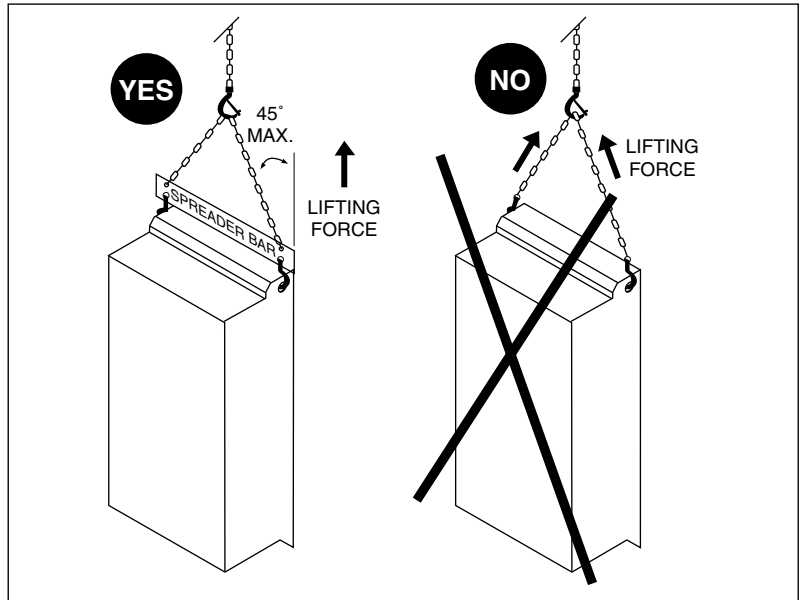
Proper Use of a Sling to Lift Floor-Mounted Controllers
